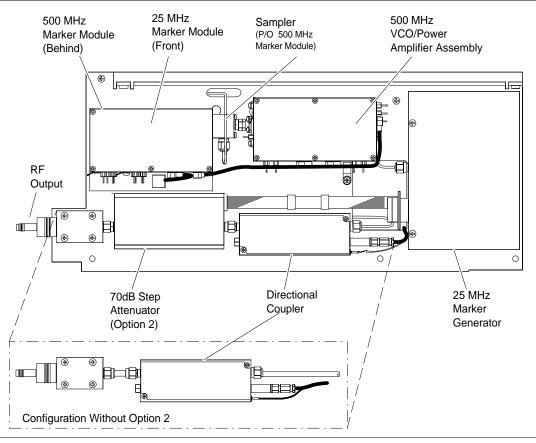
Models 54154A through 54169A RF Deck Parts Location (External Side Detail)
